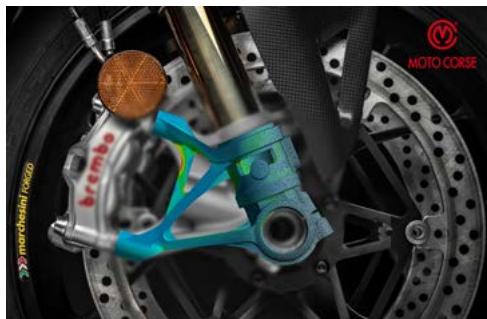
This picture shows how Moto Corse company managed to reduce the weight of the front wheel hub for a Ducati Panigale motorbike.
